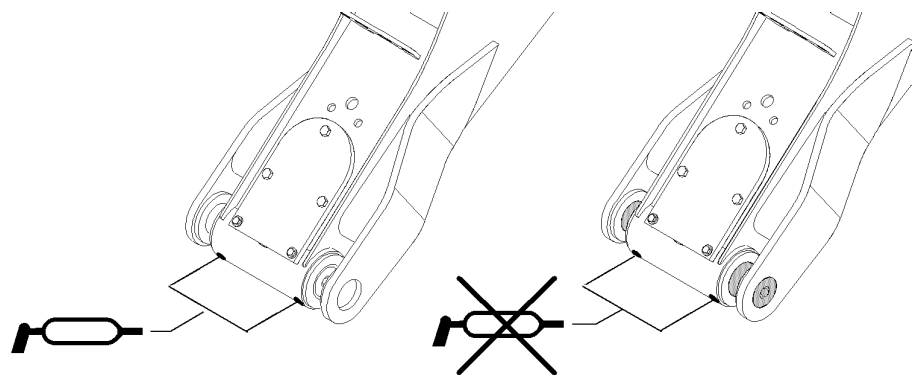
Lubricating the hydraulic quick-change adapter
